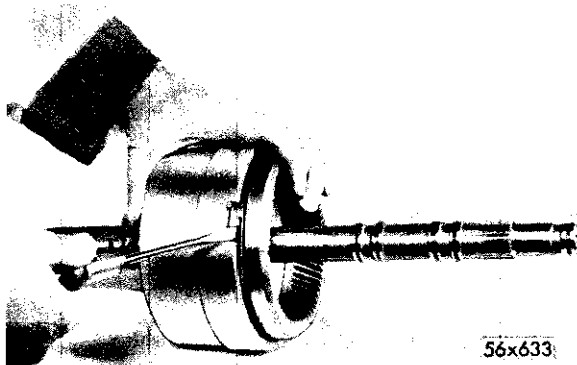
Removal and Installation of Output Shaft Drive Housing Snap Ring
